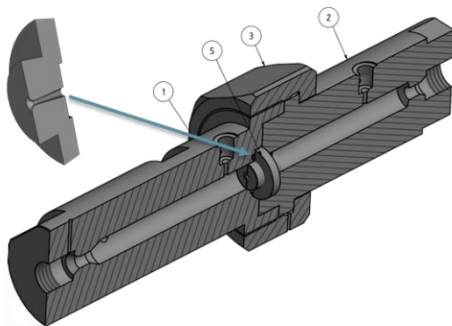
High pressure nozzle holder (design and built by EP Ehrler Prüftechnik Engineering)
